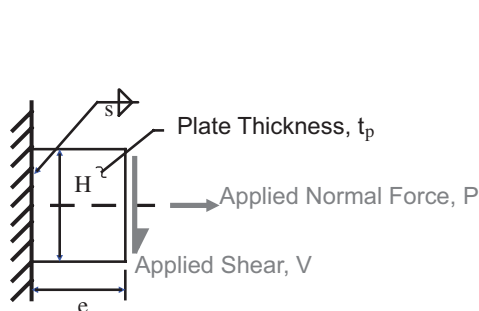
Schematic of a fillet-welded connection plate loaded with eccentric shear and a concentric normal force.
